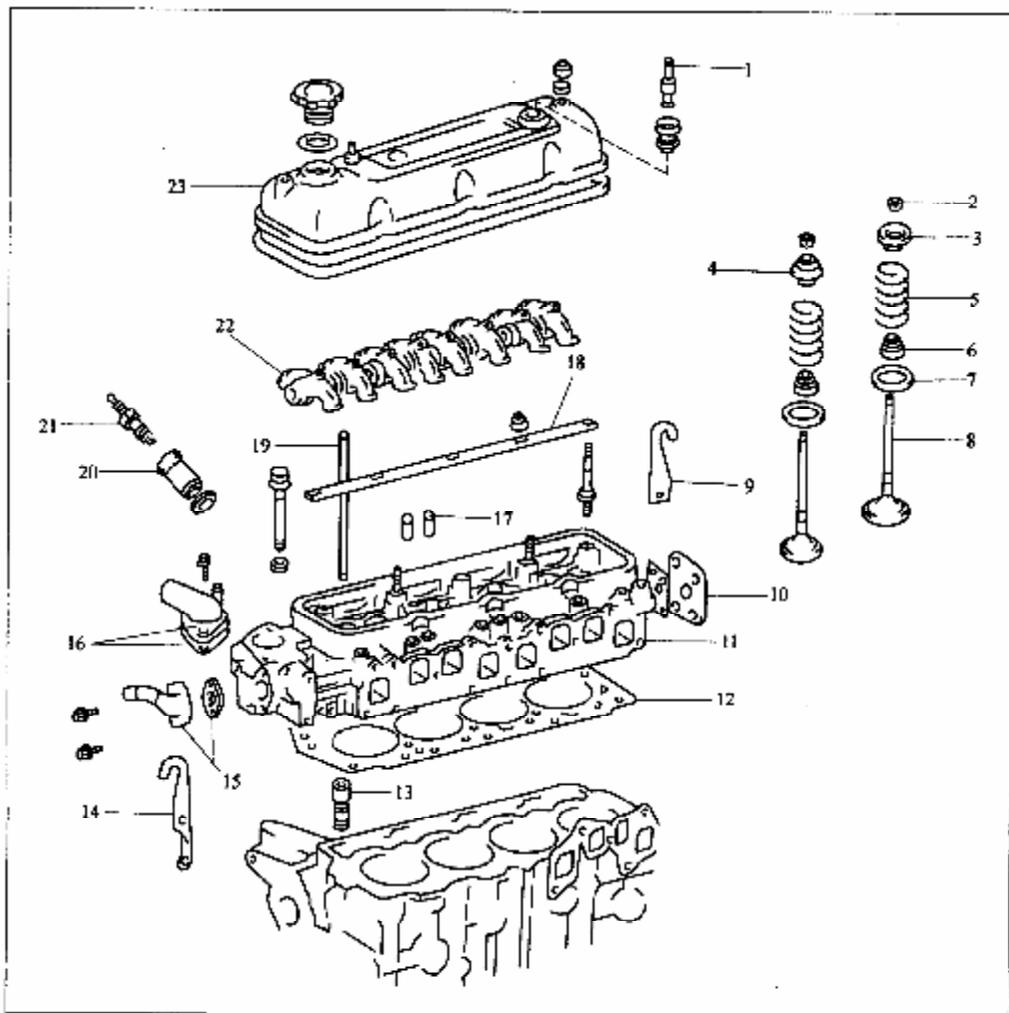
Cylinder Head Parts of BJ491EQ1 Multi Point Electronic Fuel Injection Gasoline Engine
